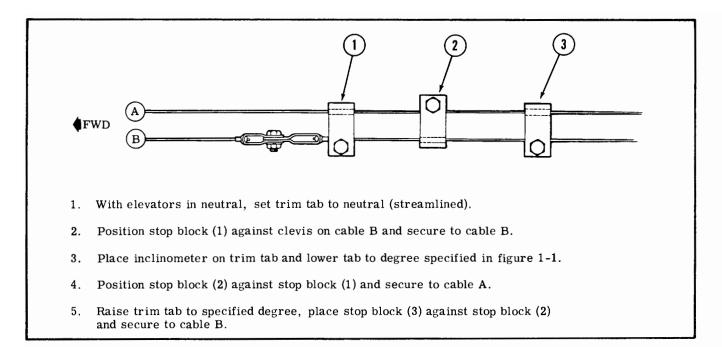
Elevator Trim Tab Travel Stop Adjustment
